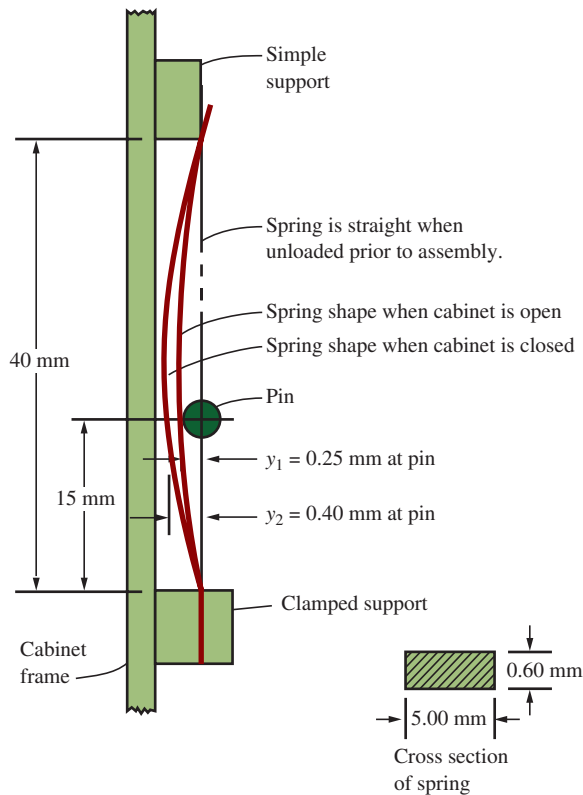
Cabinet latch spring (Problems 9 and 22)
